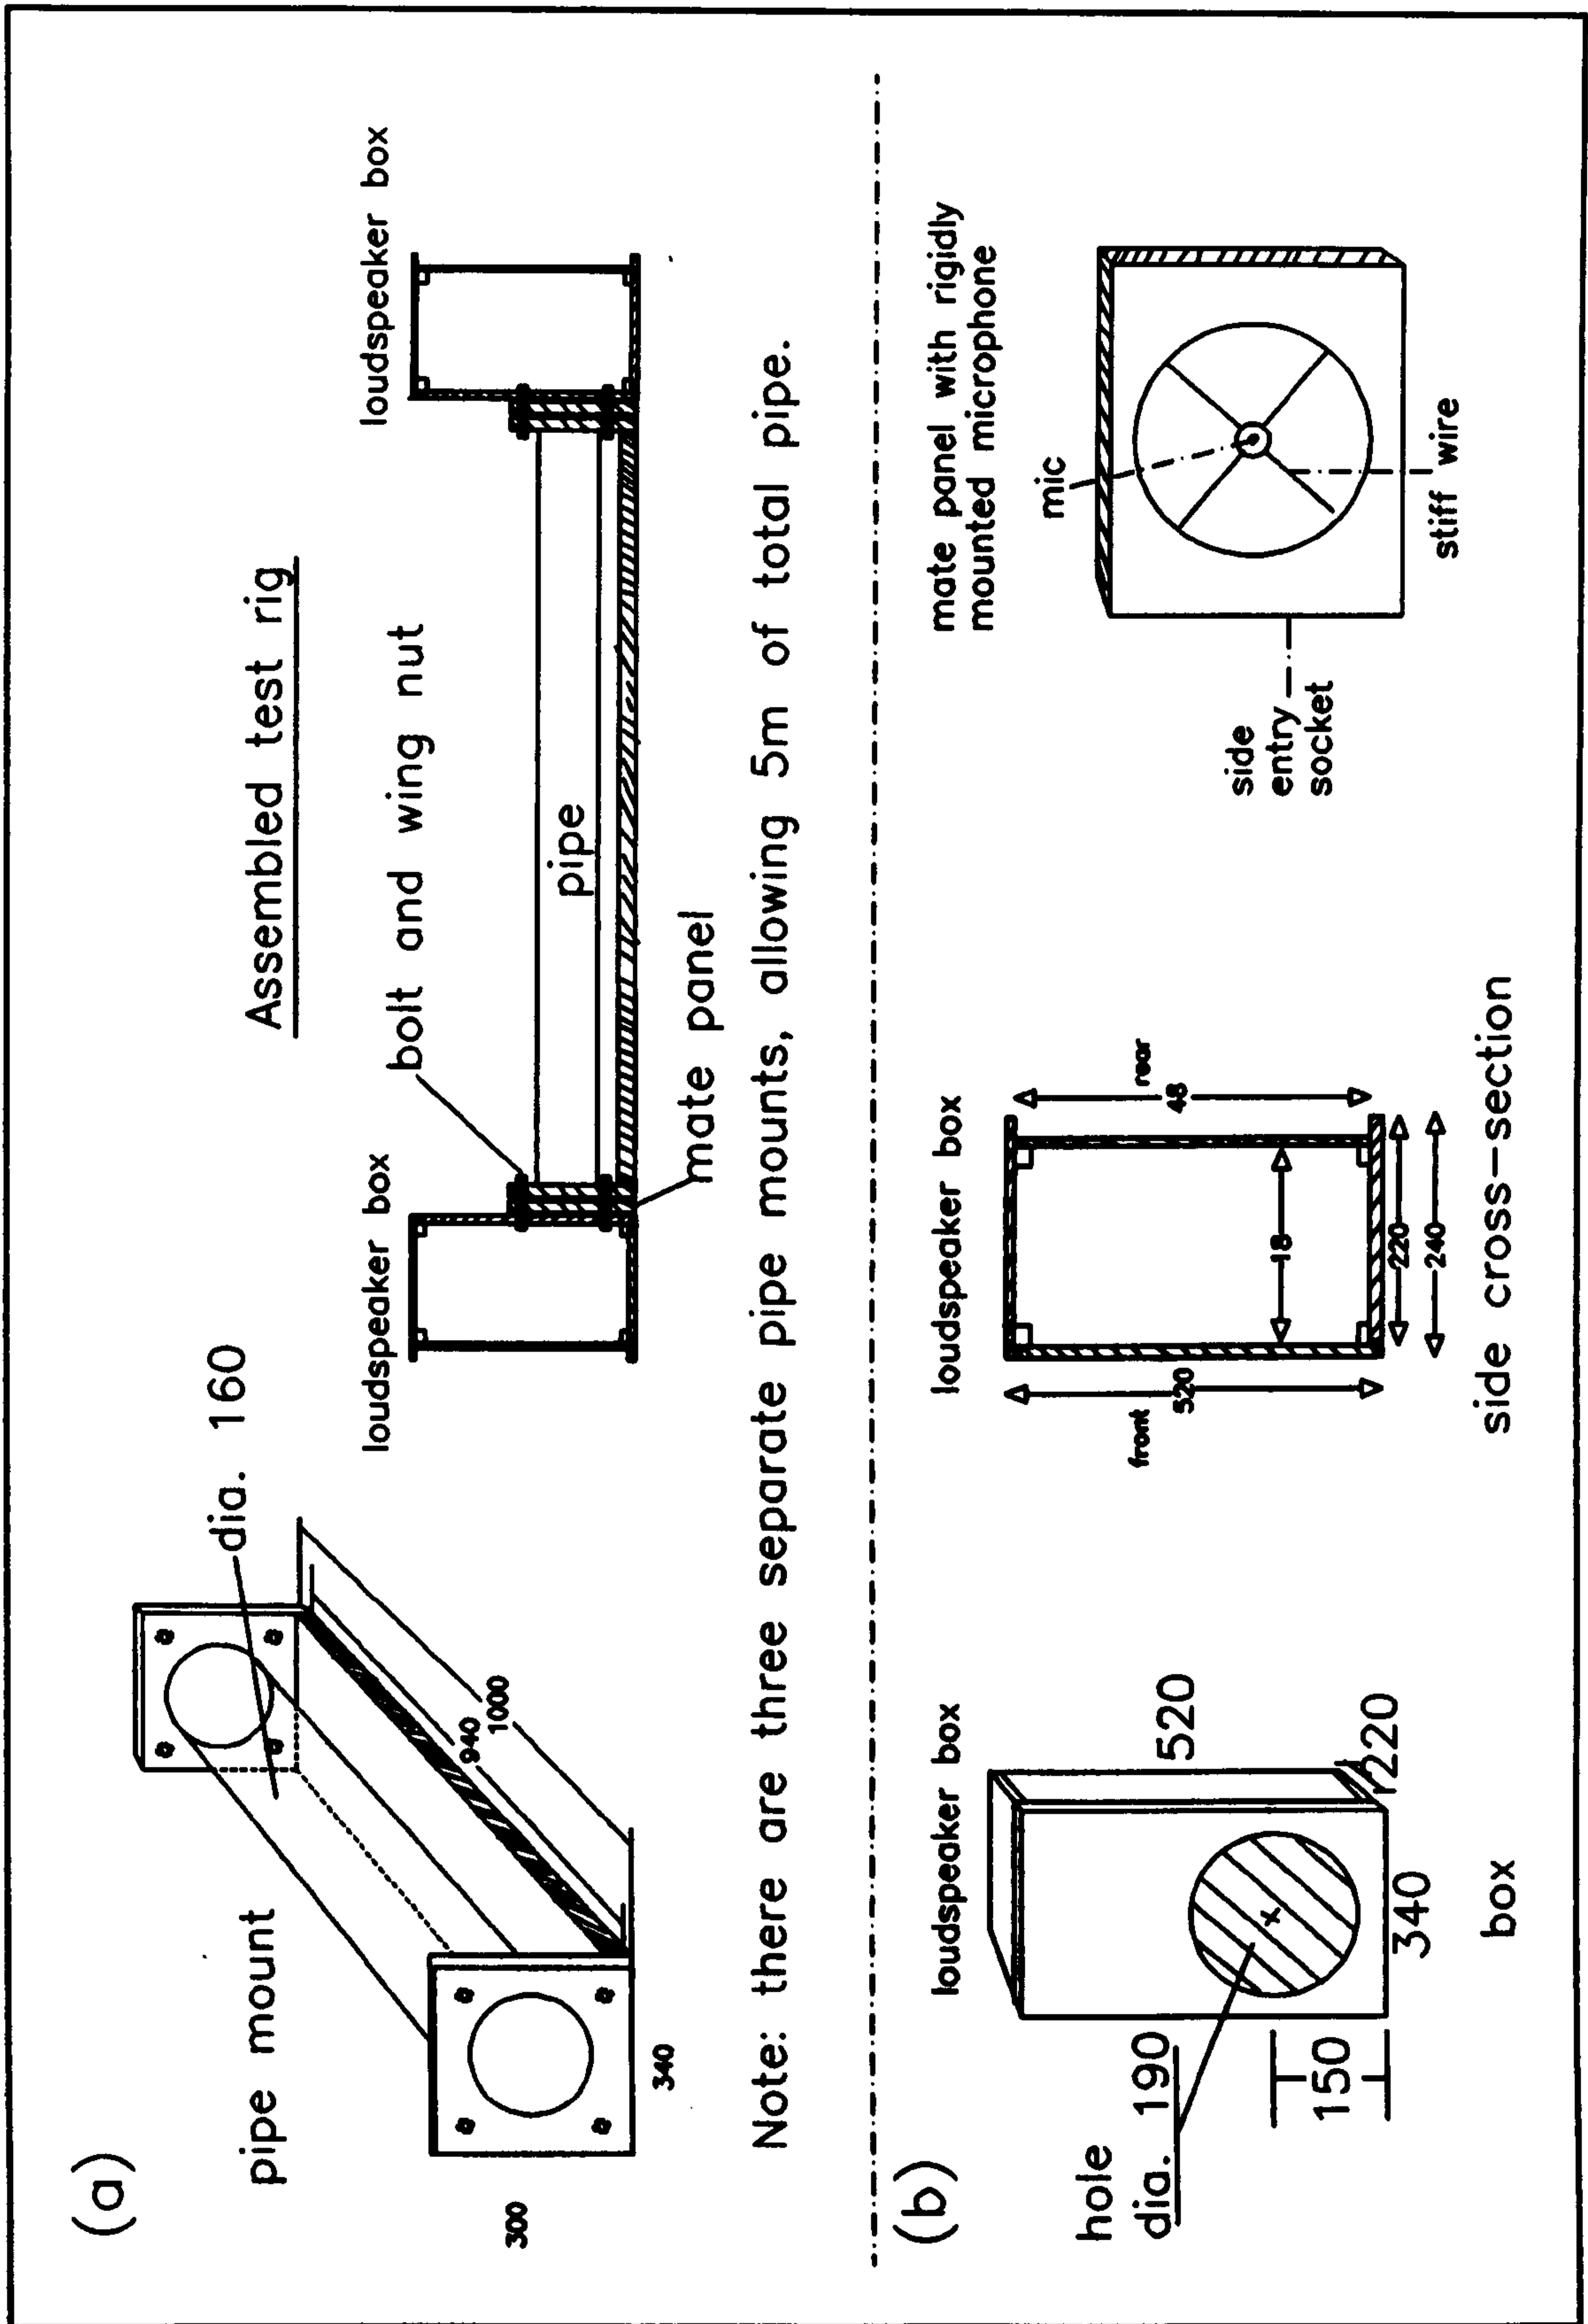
Test rig dimensions. Upper diagram (a) shows the supported duct and the assembled test-rig. Lower diagram (b) shows loudspeaker dimensions and the mate panel that is placed between duct and loudspeaker box.
